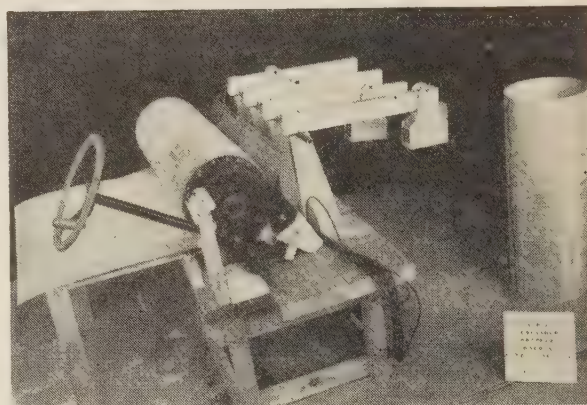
COLLAPSIBLE DRUM FOR WINDING SHELL OF FUEL TANK
